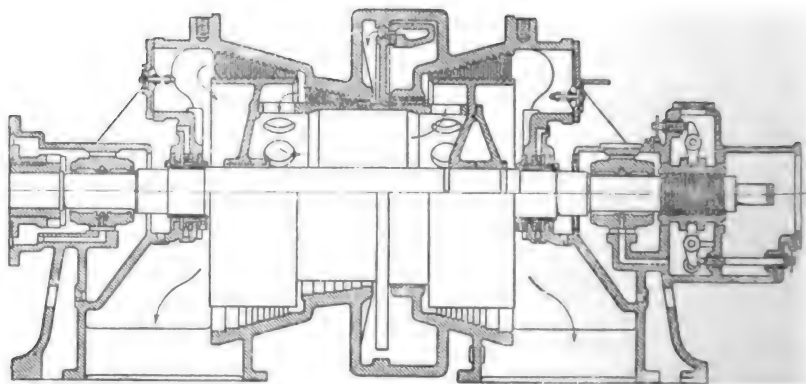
Combined Disc and Drum Single-flow Double-flow Turbine. Westinghouse Company's, 1906.
